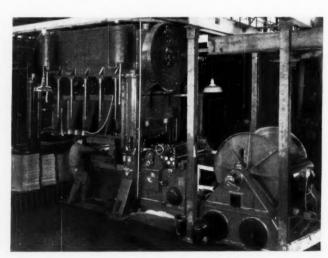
Roll feed draws wide strip from coil through roller leveler, then feeds it into fender blanking press
